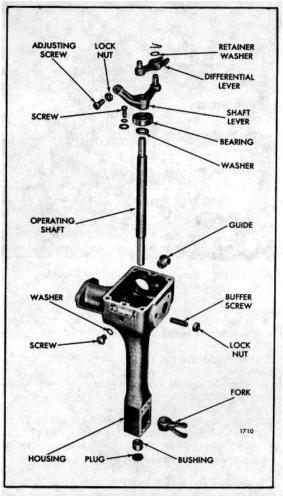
Governor Control Housing Details and Relative Location of Parts
